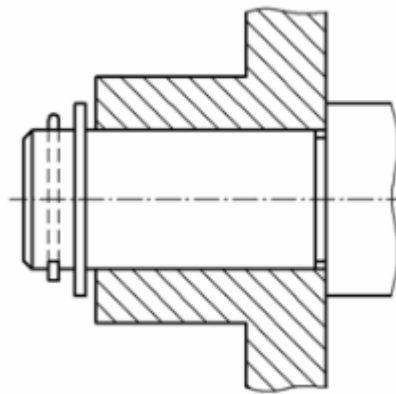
Fixing the workpiece to the shaft with a washer and pin
